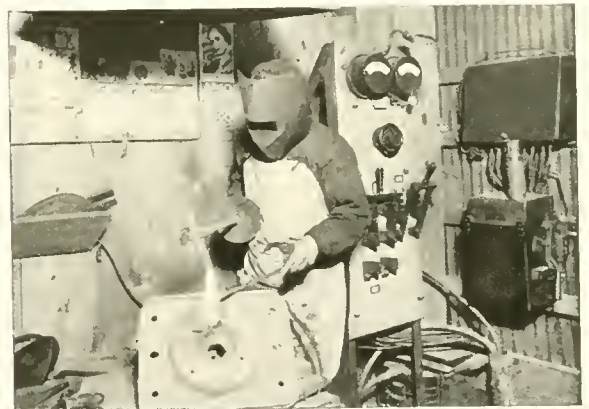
Carbon Electrode Welding. The operator holds the carbon electrode with the right hand and feeds the filling metal into the weld from a rod held in his left hand.
